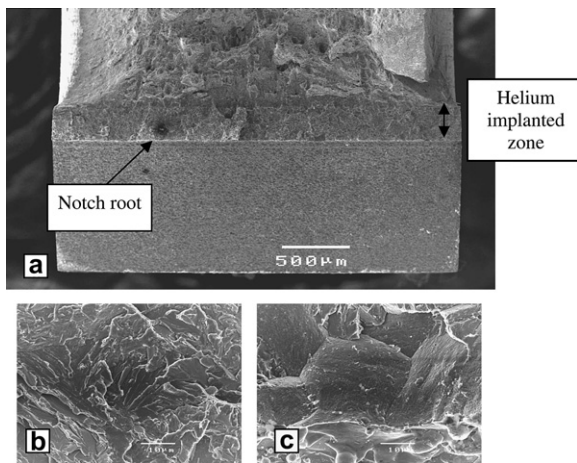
SEM micrographs showing the fracture surface of a mod 9Cr–1Mo sub-size Charpy specimen implanted with 0.25 at.% helium and tested in three point bending at room temperature: (a) partial view of the broken specimen; (b) and (c) details of the fracture surface in the brittle, helium implanted zone.
